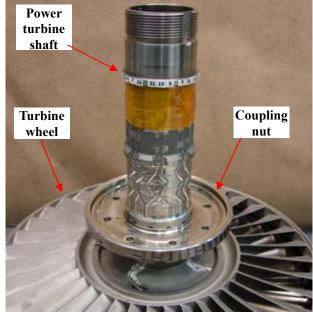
Power turbine shafting assembled with turbine blisks and coupling nut.
